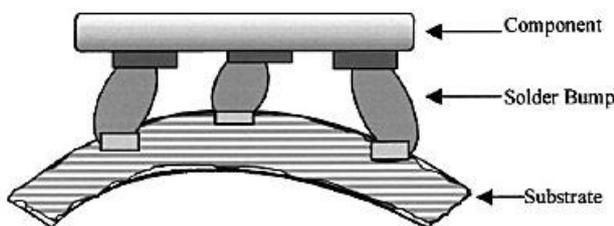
solder joint subjected to tensile loading due to substrate flexing (Abteu and Selvaduray, 2000)
